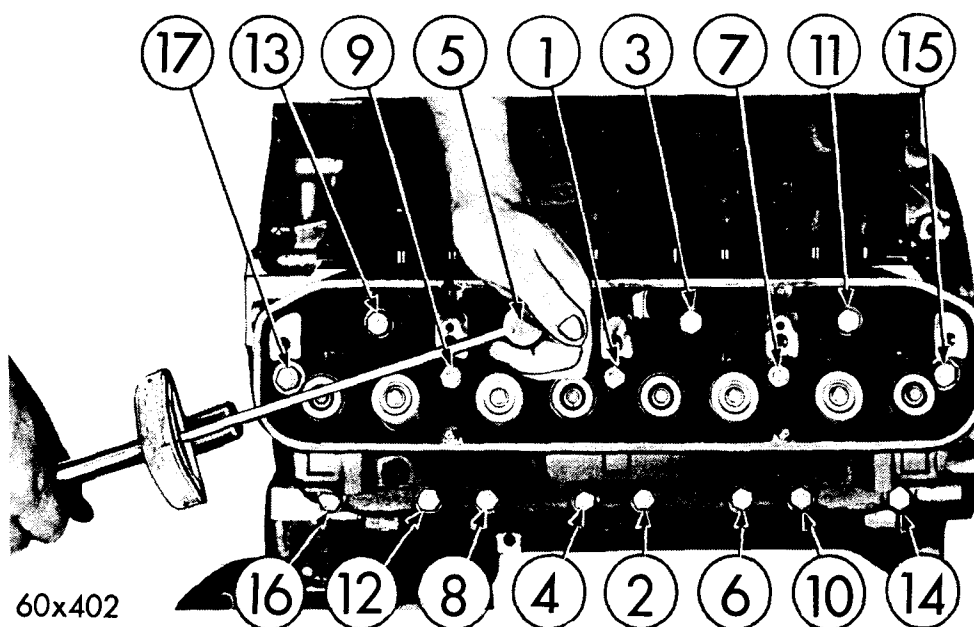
Tightening Cylinder Head Bolts (Models H-361, HB-361, HC-361, HT-361, H-413, HB-413, HC-413, HC1-413, HT-413)
